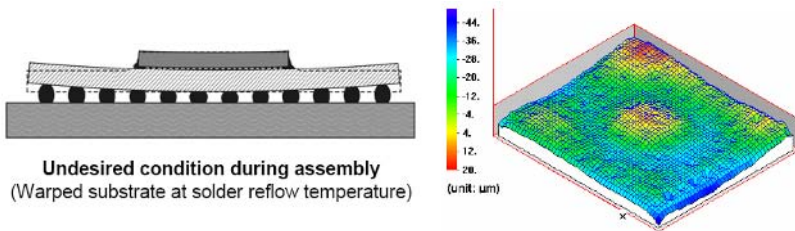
Warpage of the bottom surface of a plastic ball grid array package at the solder reflow temperature.
